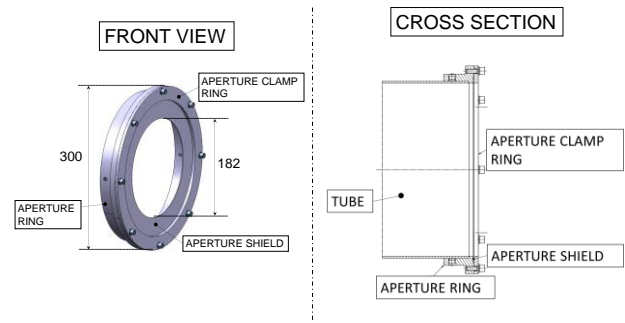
Front view of the 'Aperture Ring' assembly which is located inside the Torus Hall.
